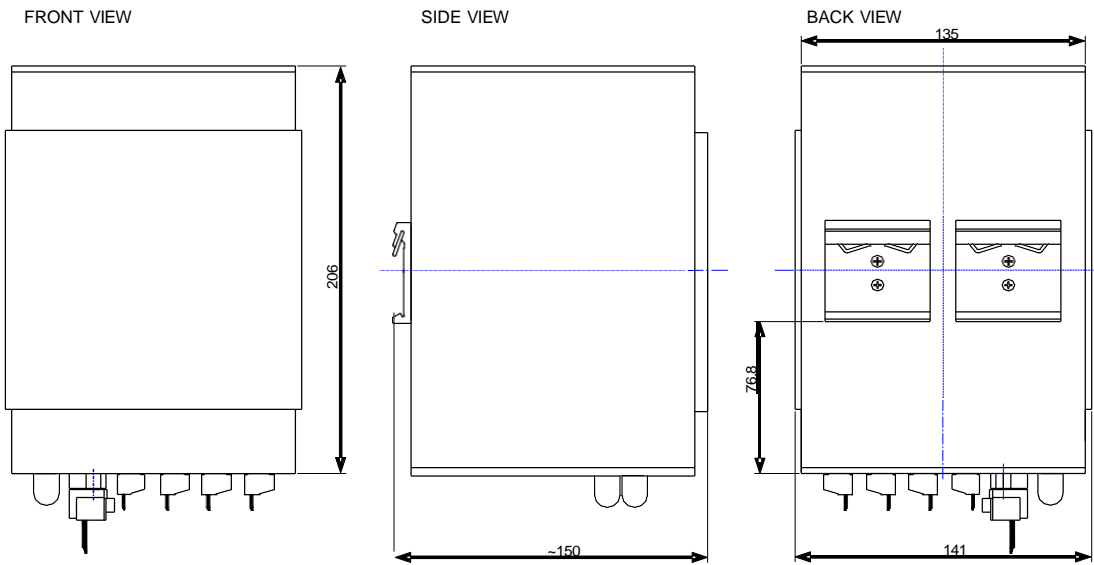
Dimensions for din rail mounting of 24 HP panel instrument case
